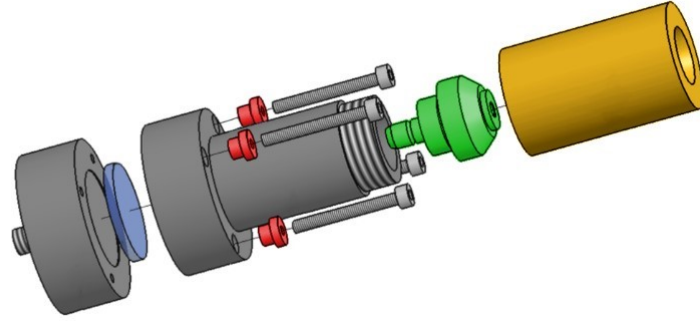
An exploded CAD model of the source assembly. The moderator cone (gold) screws onto the source assembly (green) which in turn screws into the source holder. The sapphire disk (blue) and PEEK supports (red) are visible. Taken from [43].
